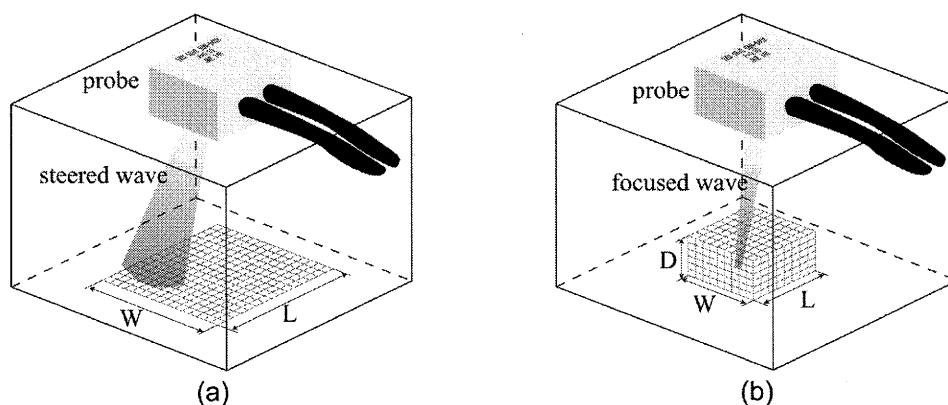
Detection Patterns: (a) Steering Pattern, and (b) Focusing Pattern
